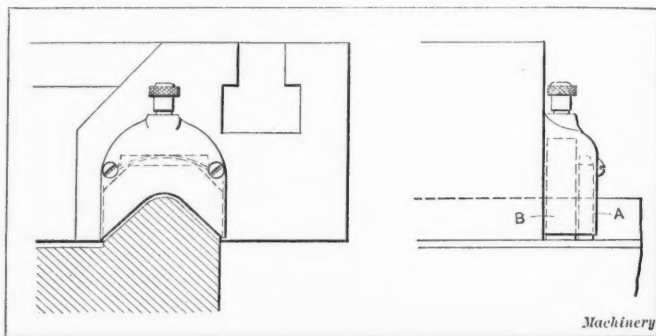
Shear Wiper, with Leather Strip and Felt Pad
